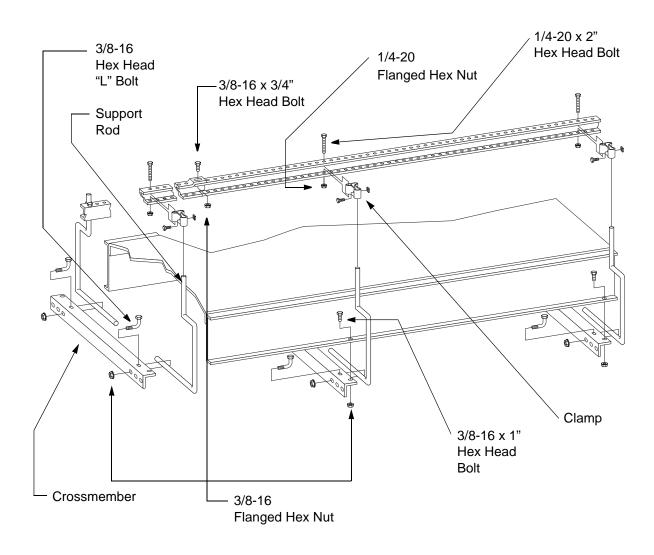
Set-in Arm Adjustable Side Guide (Exploded View)
